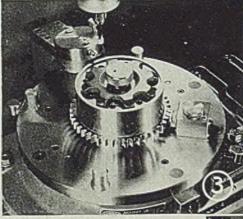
Cup-shaped gear (A in Fig. 2) mounted in fixture on jig grinder. Wheel makes two passes in each of eight straight, round holes—0.001-in. being left for final pass. Indexing turret at rear holds two diamonds. One dresses wheel for roughing, the other for finishing Fig. 4—Setup for "spoked" gear (D in Fig. 2). Revolving and traversing at operating rate, wheel is dressed by preset diamond, then continues on to grind curved face of spoke to correct radius and location. Hole in top of arm locates diamond-setting block, not shown
